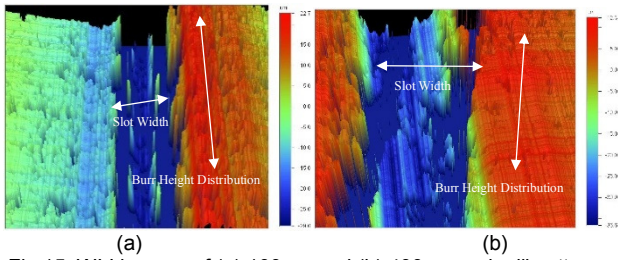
WLI images of (a) 100 μm and (b) 400 μm end mill cutter on 20 μm thin Ni workpiece
